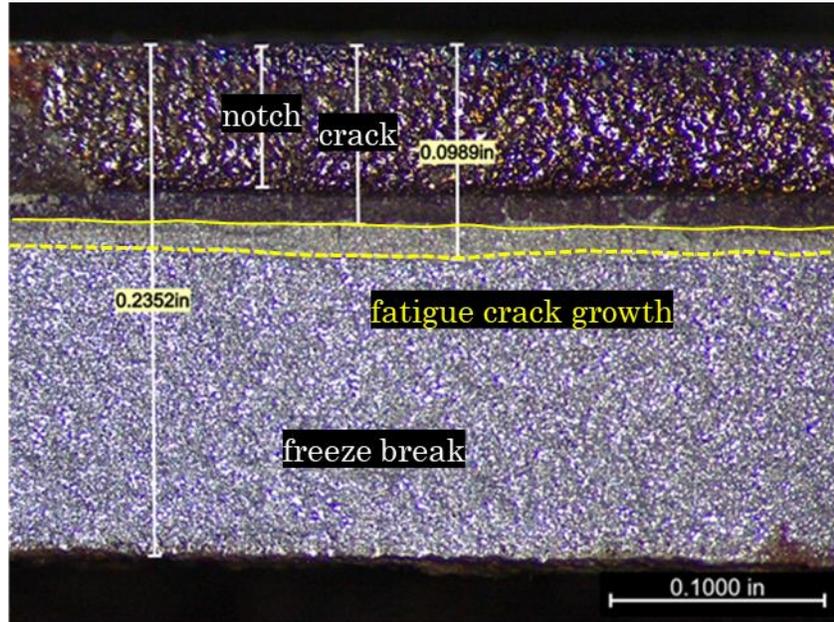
Fatigue Crack Growth Appearance in Pipe Sample 14R
